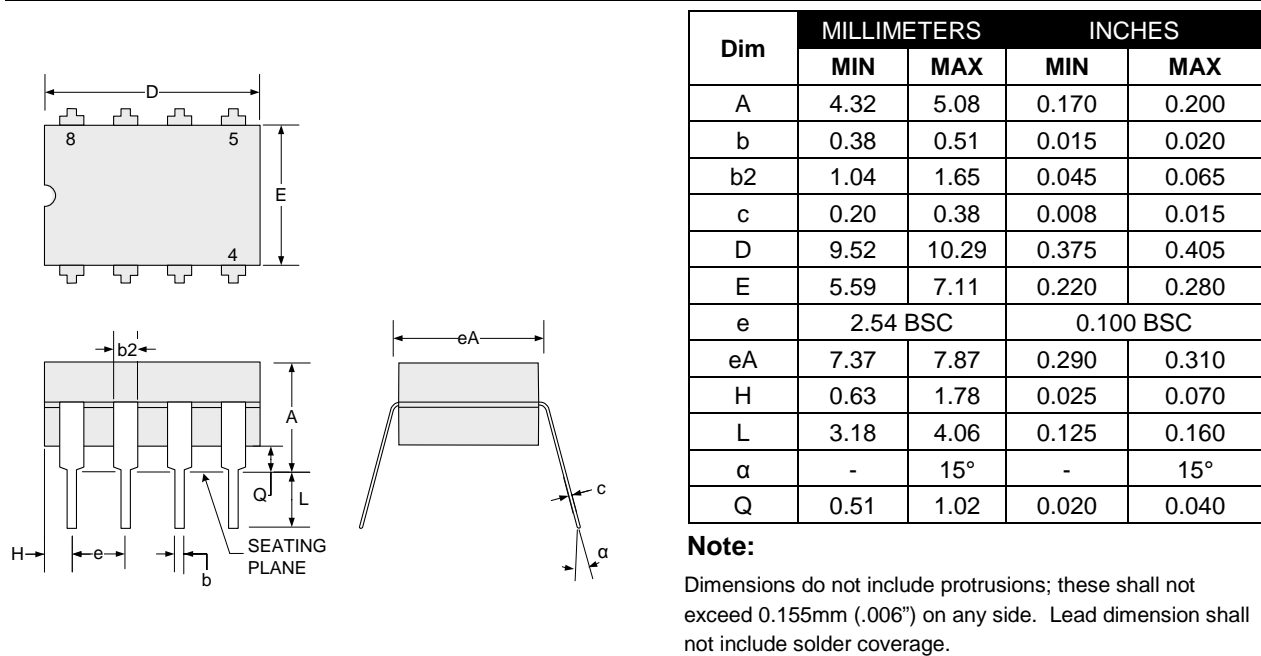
Y 8-Pin CERDIP Package Dimensions
